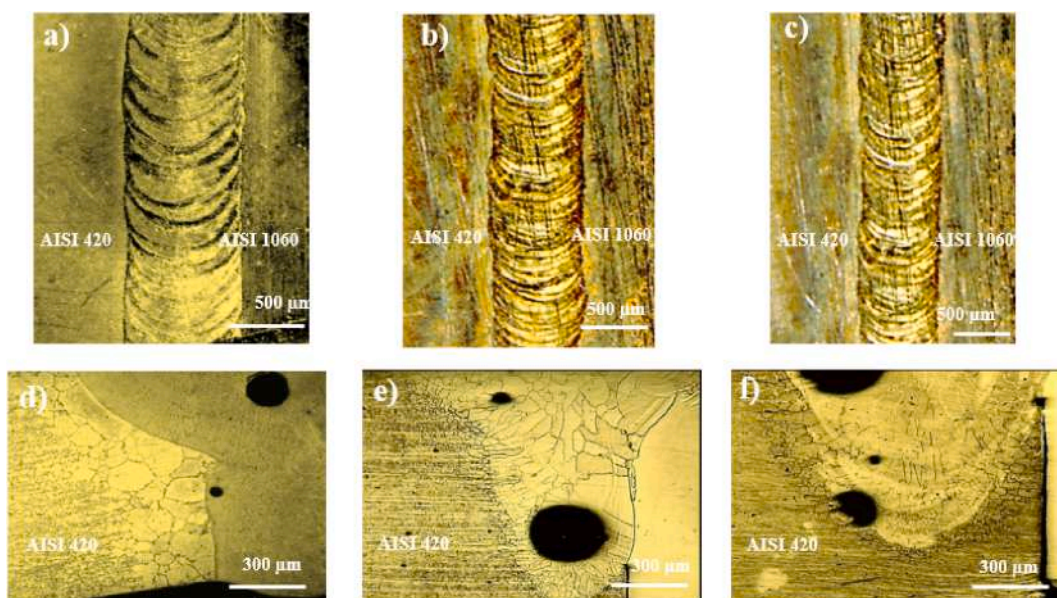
Weld bead surface morphology for different welding speeds of a) 150 mm/min, b) 250 mm/min, c) 300 mm/min and related melt pool shape for welding speed of d) 150 mm/min, e) 250 mm/min, f) 300 mm/min.
